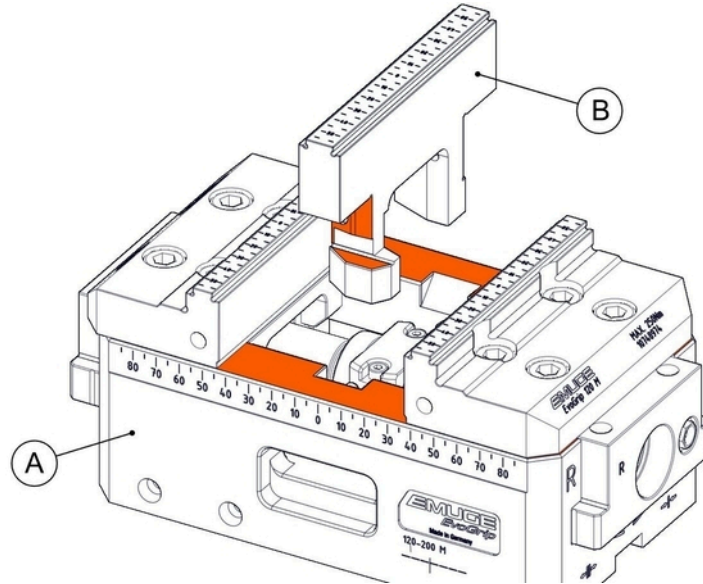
Schematic illustration: Clamping variant for clamping 2 workpieces
